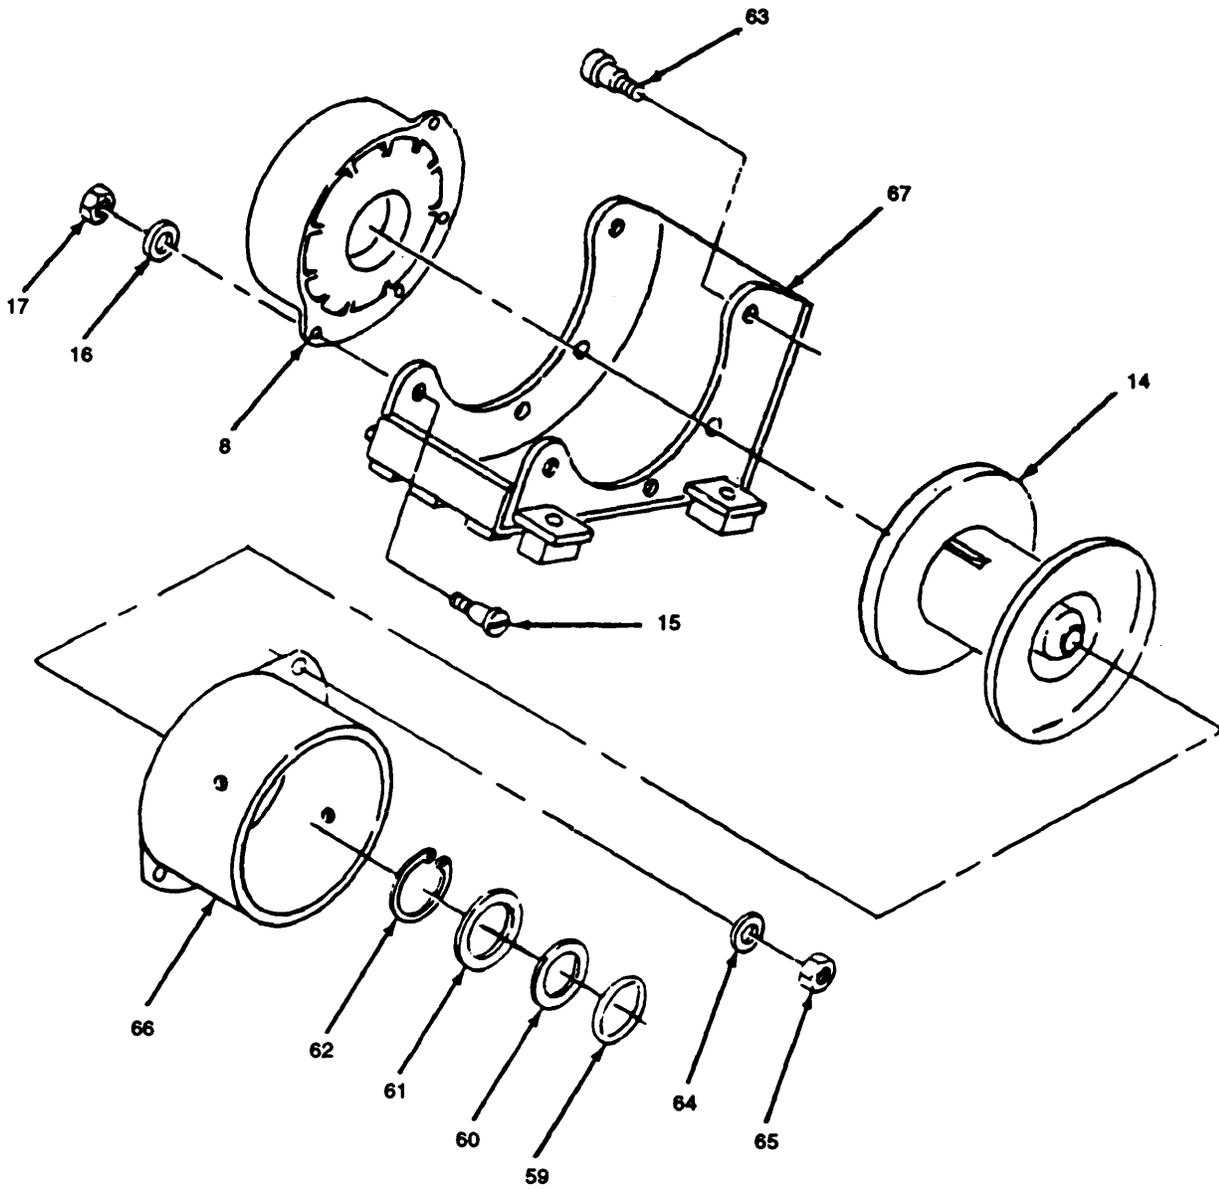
Winch Assembly Model 11-S-EC, Reassembly (Sheet 2 of 10).
